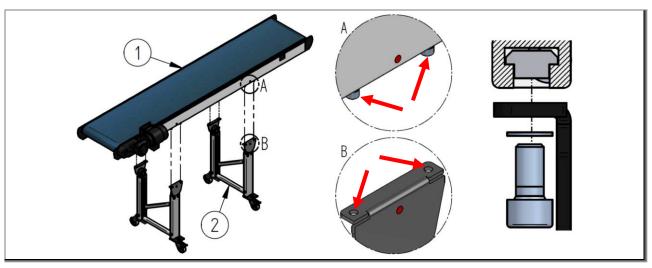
Assembly, conveyor with support AM 010 (typical)
